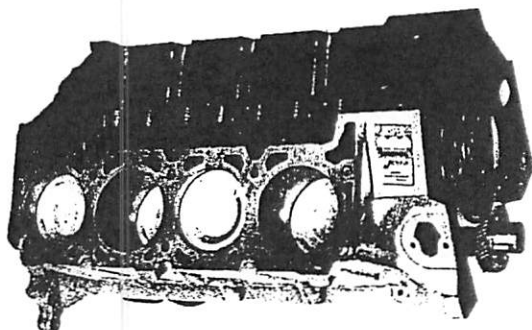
Basic short block assembly. Courtesy of Jasper Engine and Transmission Exchange, Inc.
